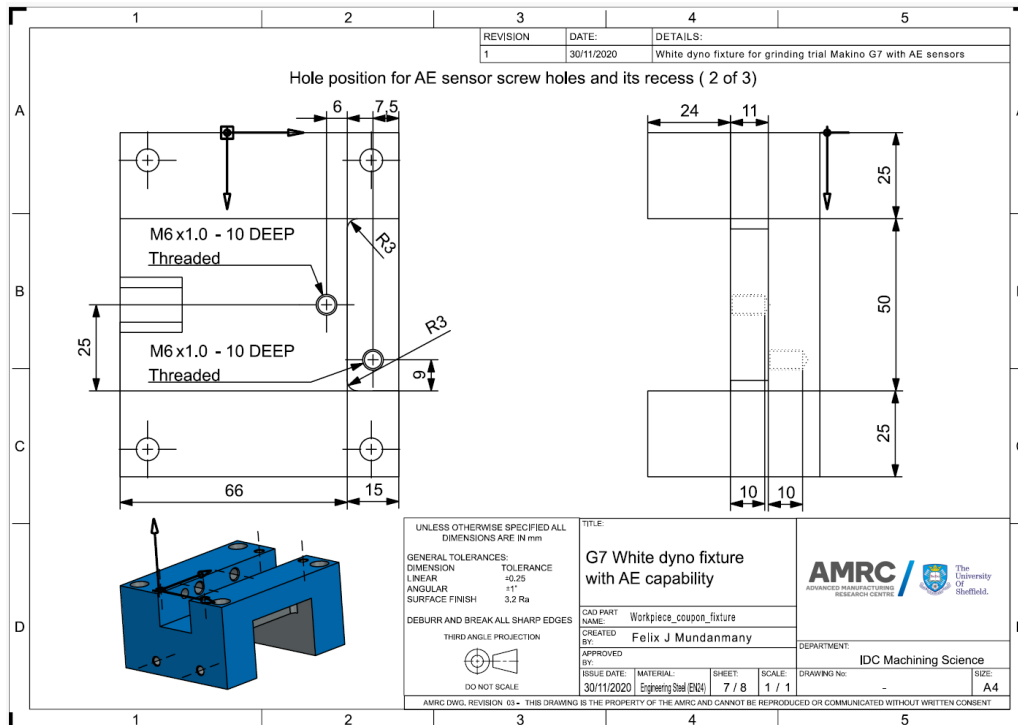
Drawing showing position (ii) for Kistler Type 8152001 sensor and M6 threaded hole to accomodate jig that clamps Mistras AE sensor and holds accelerometer in place.
